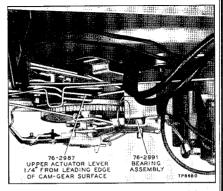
Tone-Arm Horizontal Timing Adjustment, Showing Upper Actuator Lever in Contact with Cam Gear
